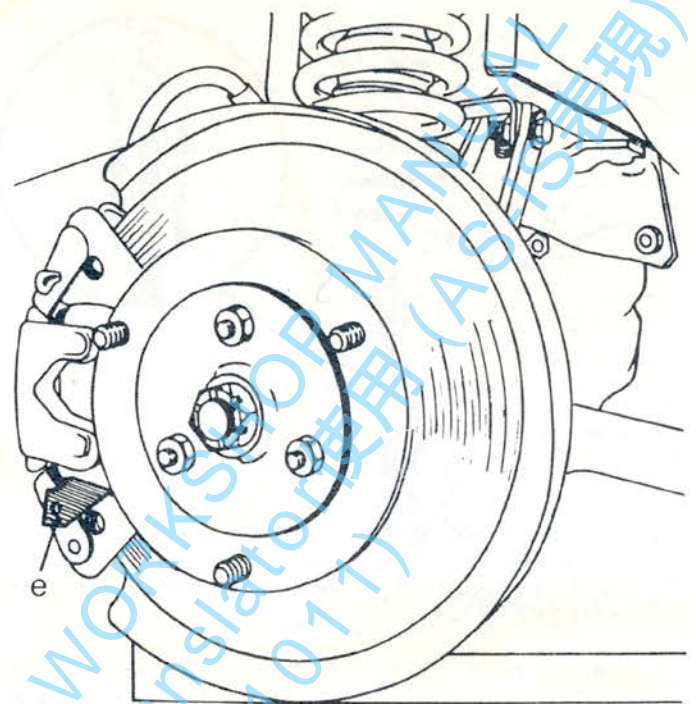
13 Shims fitted to reduce excessive pad end clearance
